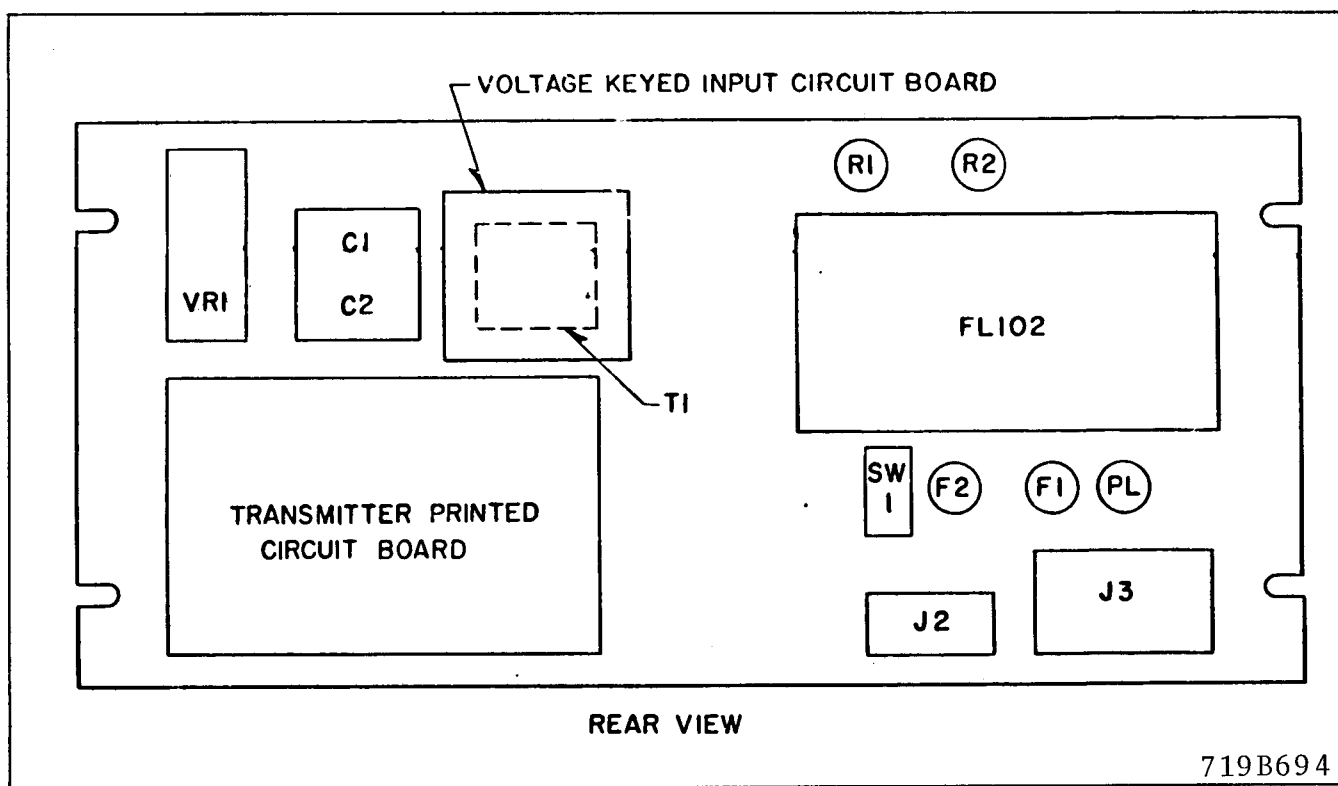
Component Locations on the Type TCF Transmitter Assembly.
